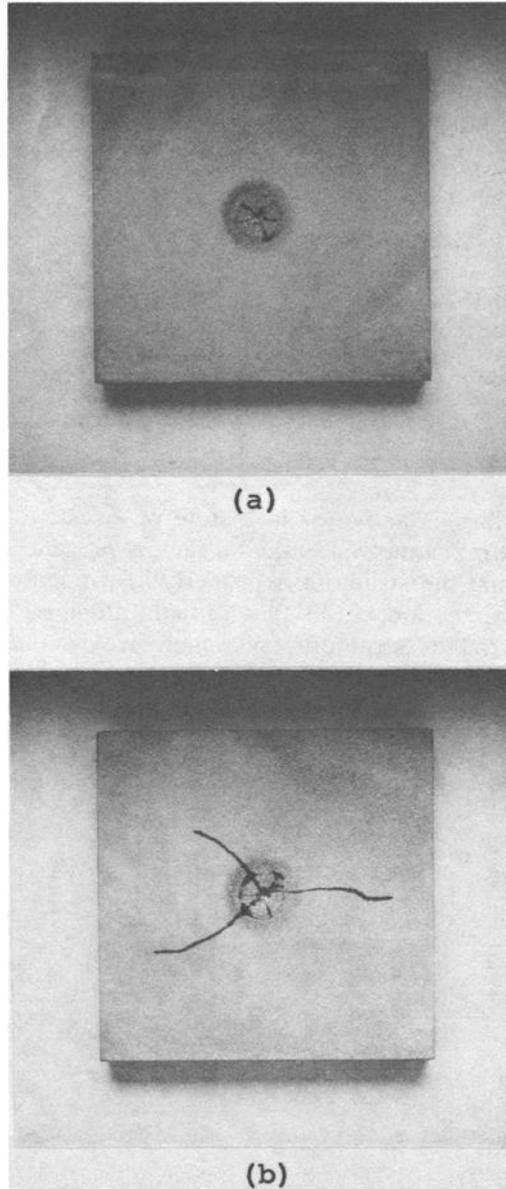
Beryllium weld test coupons showing crater cracking in Specimen WT-70 (a) and gross cracking in Specimen WT-71 (b).
